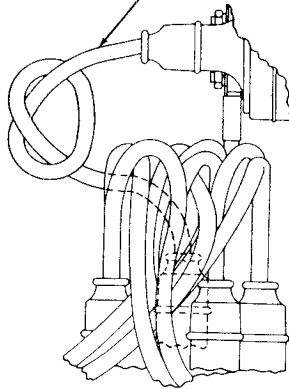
DISTRIBUTOR SUPPRESSOR LEAD 563-0006
